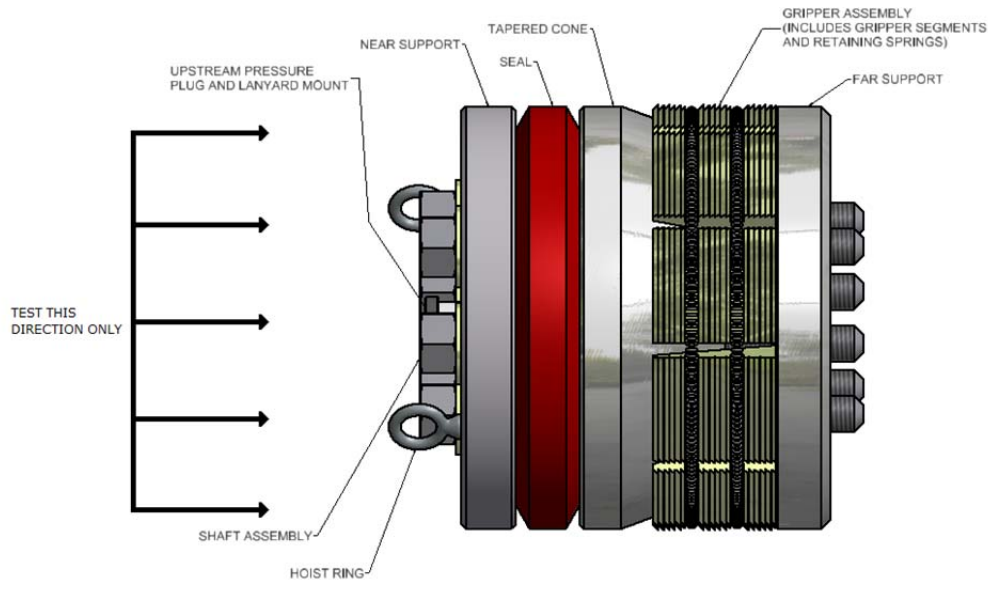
8" - 12" (DN200 - DN300) GripTight Reverse Pressure Test Plug
